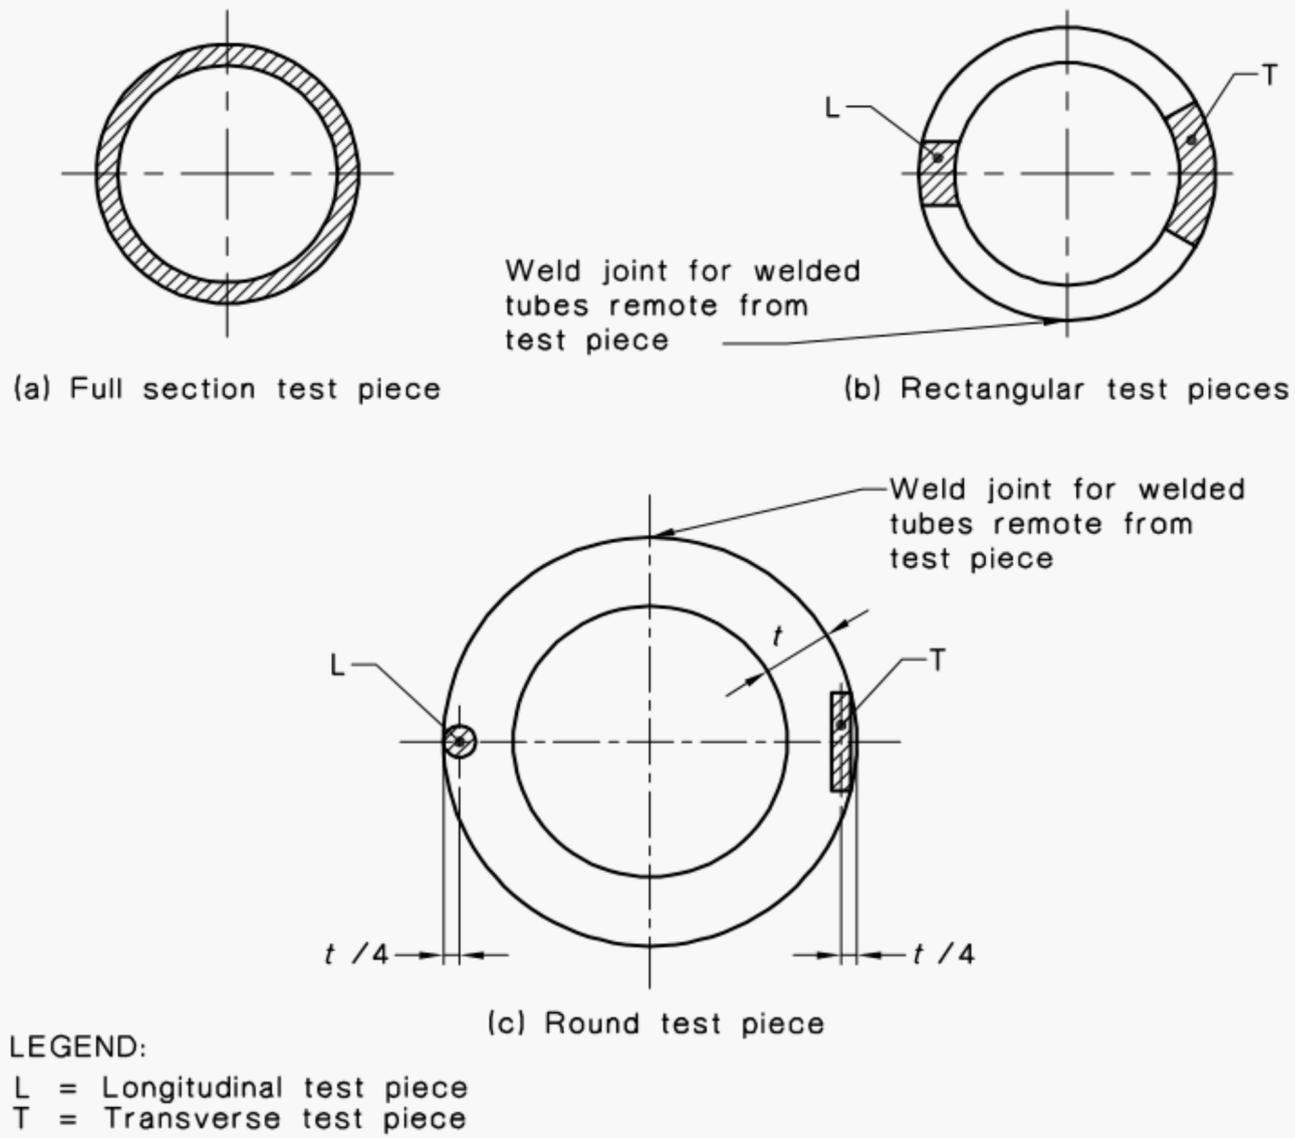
TUBULAR PRODUCTS—LOCATION OF TEST PIECES FOR TENSILE TESTING OF TUBES AND CIRCULAR HOLLOW SECTIONS
